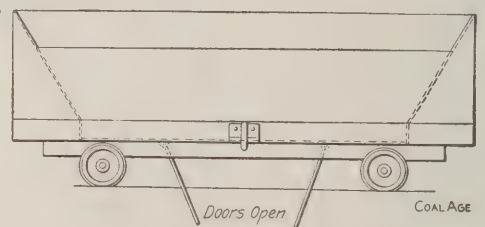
SIDE VIEW OF SAME CONVEYOR
